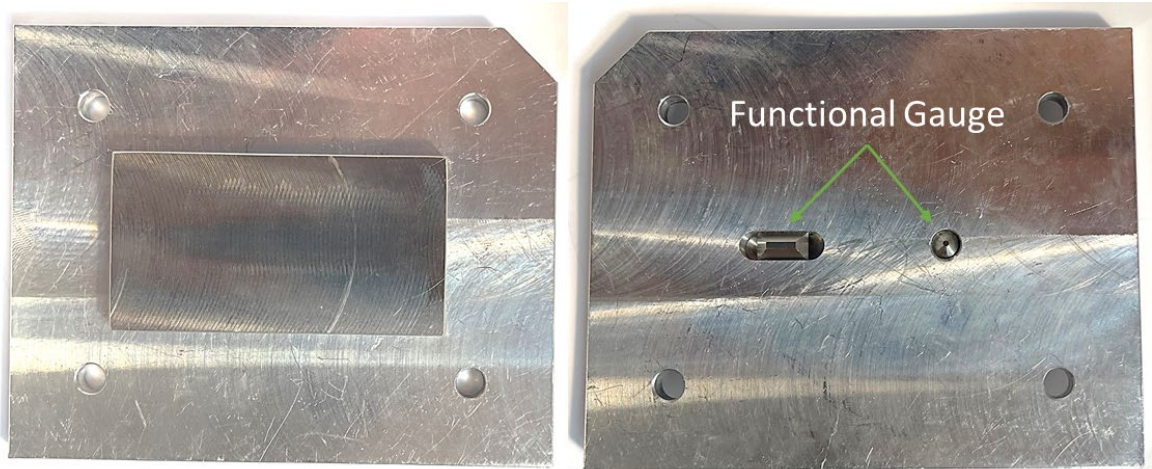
Position of hole and slot inspection method using functional gauge from the front view (left) and back view (right)
